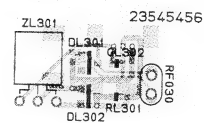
U0015 F-REM PC Board (Bottom Side)
